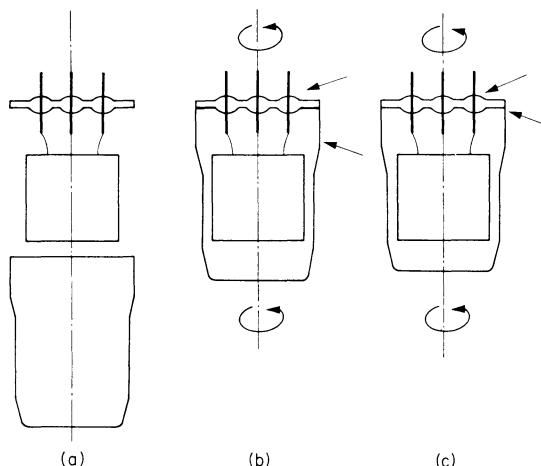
Butt sealing process: (a) seating the assembled disc in the bulb; (b) preheating the lead-throughs and the edge of the bulb; (c) sealing with sharp flames
